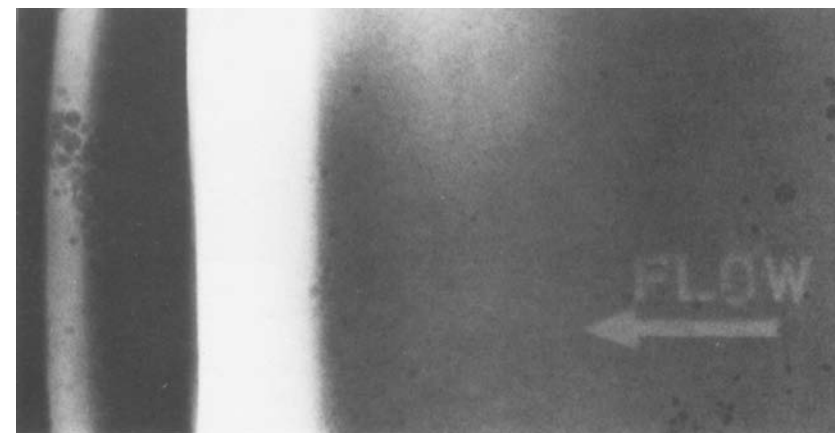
Gas-holes and porosity in an aluminium alloy casting
